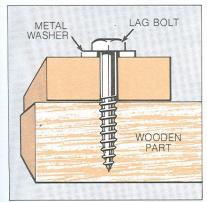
Lag bolts are often used when it is inconvenient or impossible to use a nut-and-bolt arrangement. Washers should be used under the head
